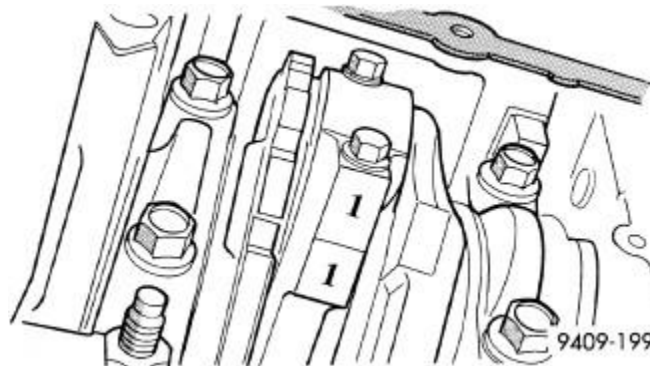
Identifying Mark On Connecting Rod And Bearing Cap
